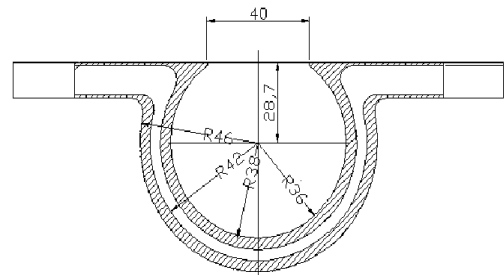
Cross section and dimensions of the Chill Mold [mm].
